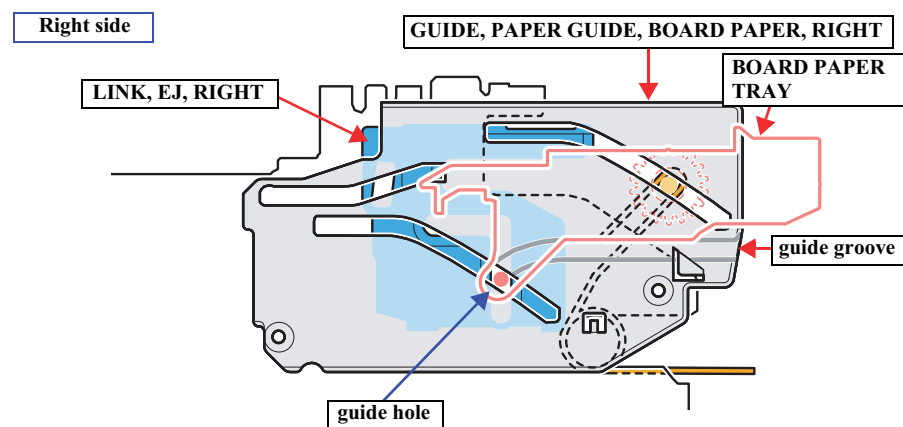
Guide holes of the LINK, EJ, RIGHT and GUIDE, PAPER GUIDE, BOARD PAPER, RIGHT
